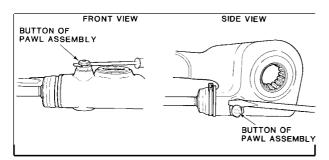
"Pull" Pawl Button On Rockwell Automatic Slack Adjuster
